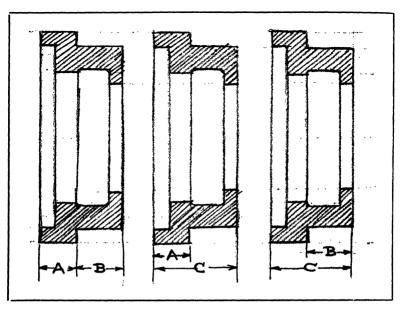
If You Were Dimensioning this Part, Would You Give Dimensions A and B, A and C, or B and C?
